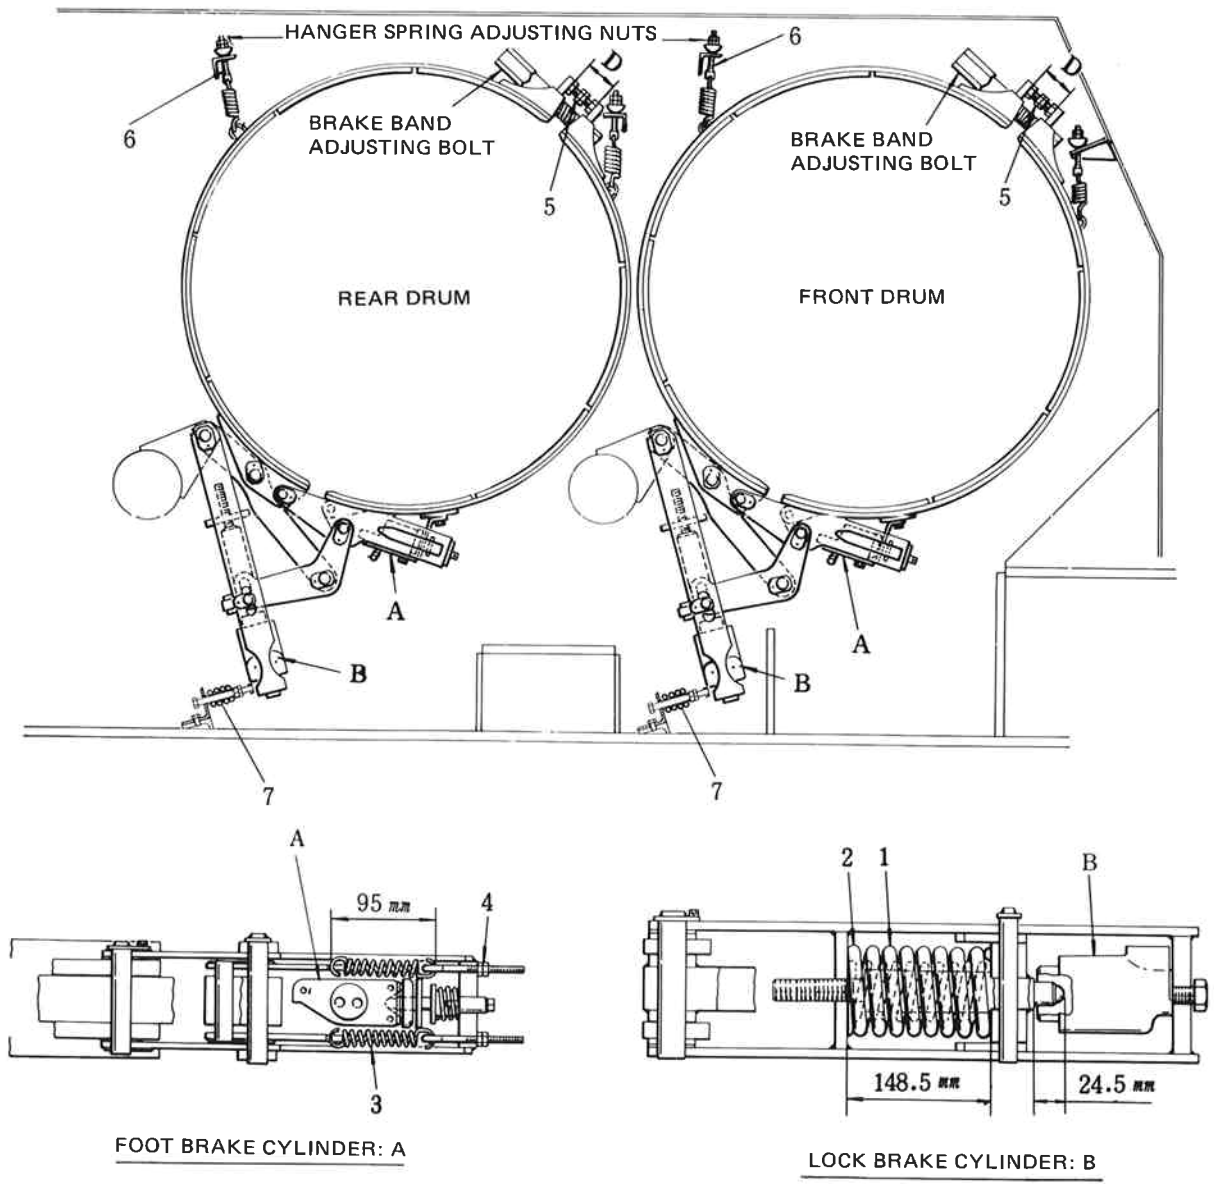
Main (Front and Rear) Drum Brake Adjustment
